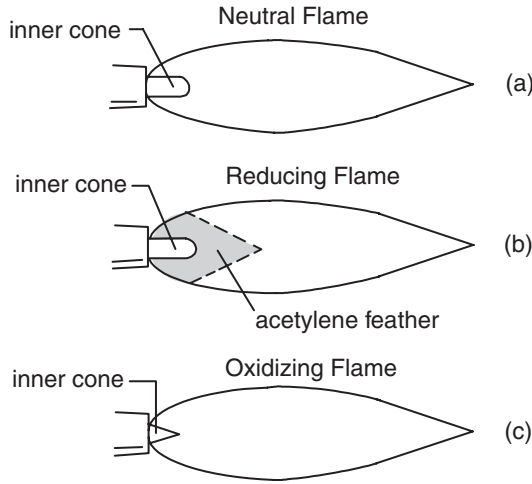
Three types of flames in oxyacetylene welding. Modified from *Welding Journal* (4). Courtesy of American Welding Society.
